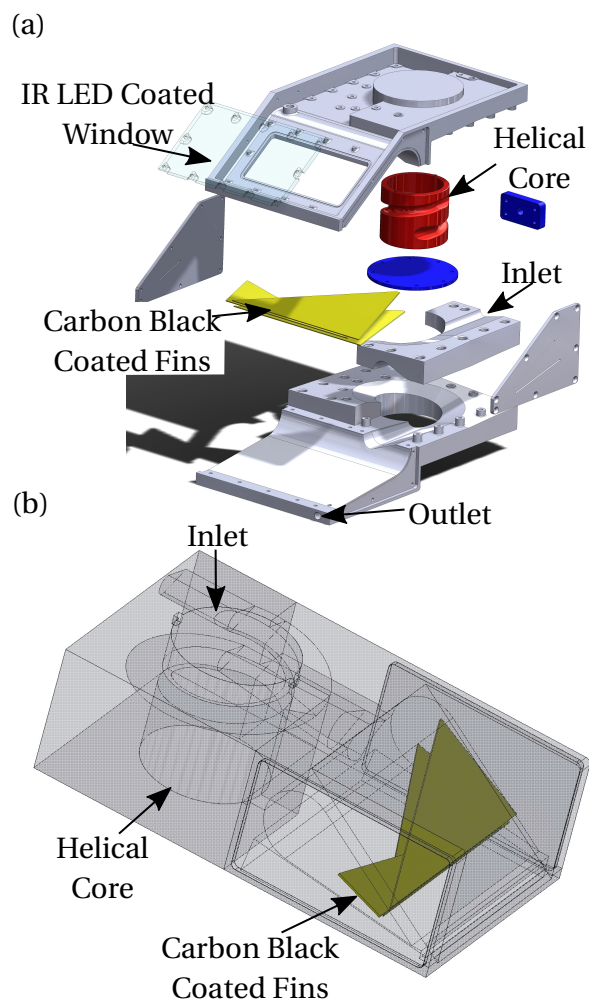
(a) CAD rendering of static phase separator exploded assembly view. Metal components (gray and blue) are made of aluminum, fins (yellow) are carbon black coated aluminum, and helical coil (red) is 3D printed out of polylactide (PLA). (b) A CAD rendering of the assembled static phase separator with transparent features showcasing inner geometries of the device.
